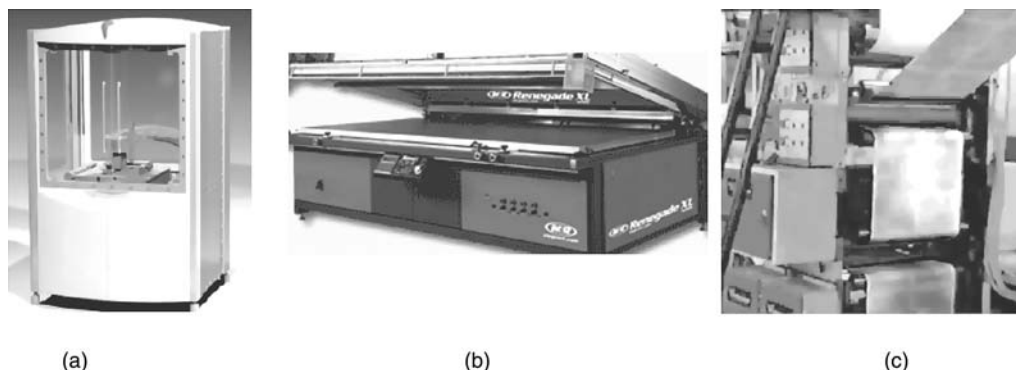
Typical manufacturing tools used for (a) ink-jet printing, (b) screen printing, and (c) roll-to-roll processing.
